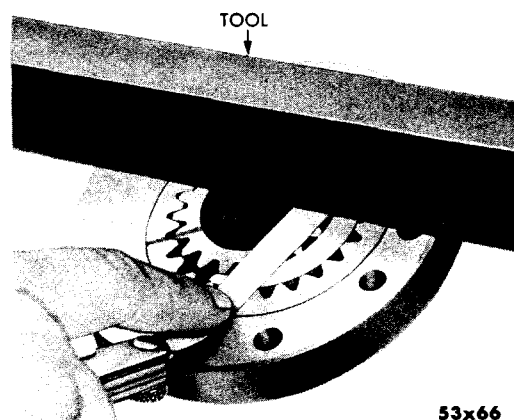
Checking Clearance Between Pump Body and Gears Using Tool C-3335
